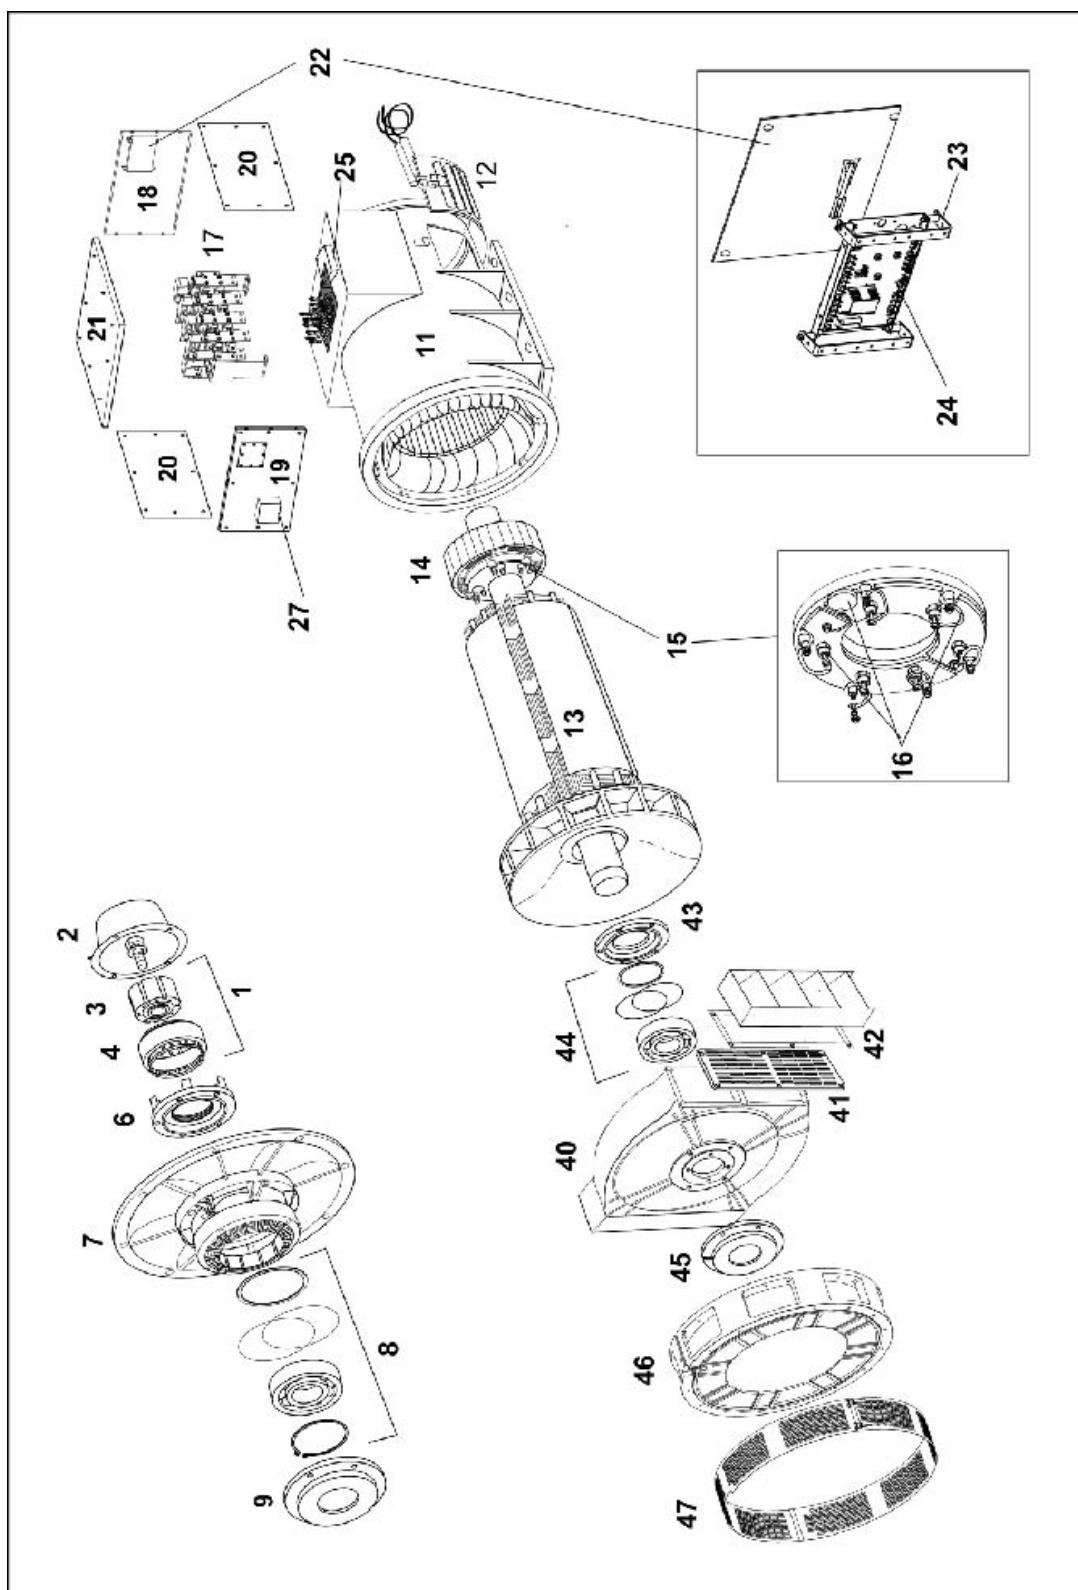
HC6 TWO BEARING ALTERNATOR
